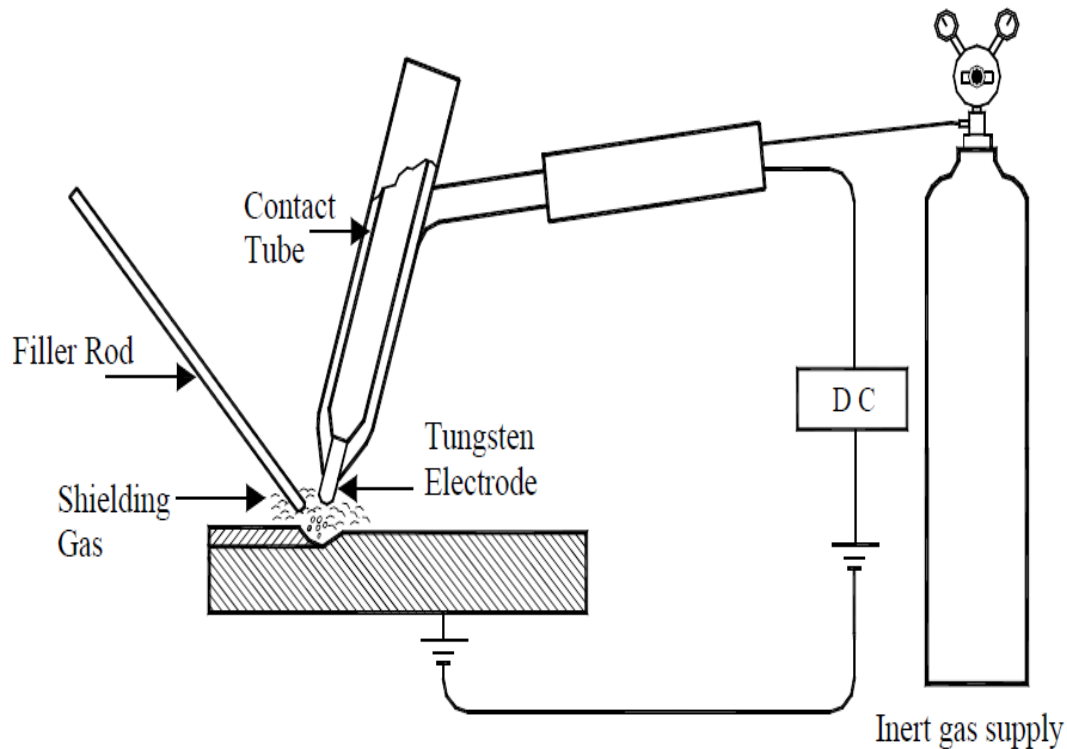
Gas Tungsten Arc Welding Process
